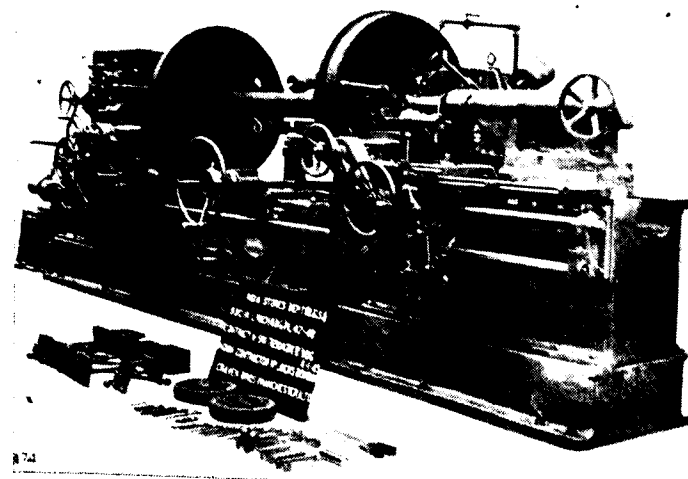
Friction roller Type axle journal returning & Burnishing lathe. (craven make)
